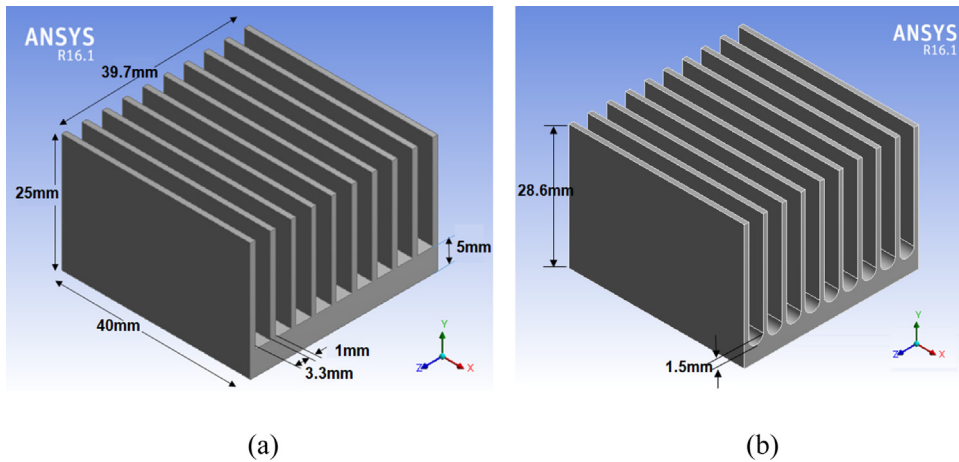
The geometrical model (a) Conventional design and (b) Proposed design.
